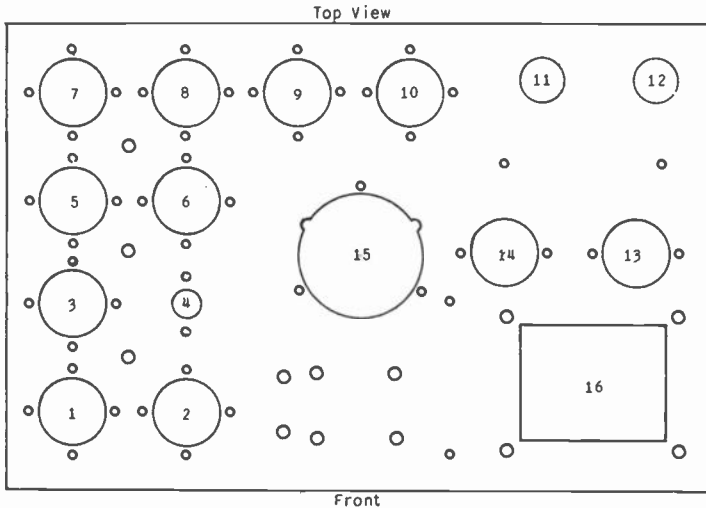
This is a top view of your metal chassis showing the location of the various holes punched in this chassis. Each hole has been numbered so that a description of the use of this chassis is made easier for all concerned.
